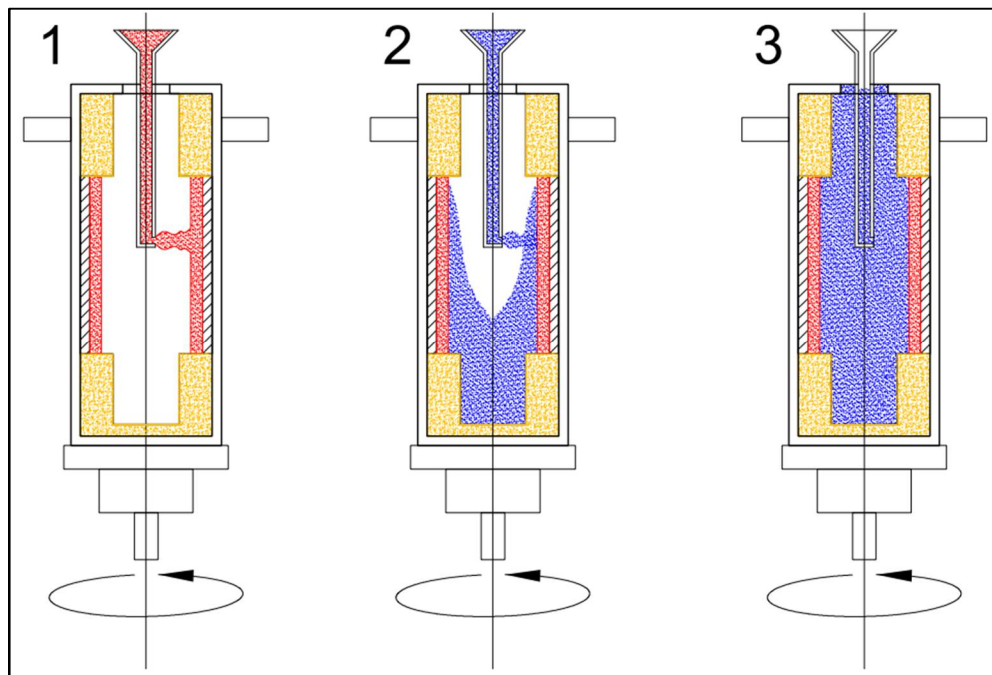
Centrifugal casting of bimetallic rolling mill rolls by MK industry
